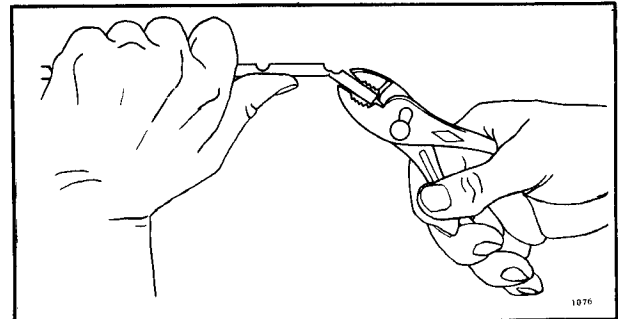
SHORTENING THE CAPILLARY HOLDER.
